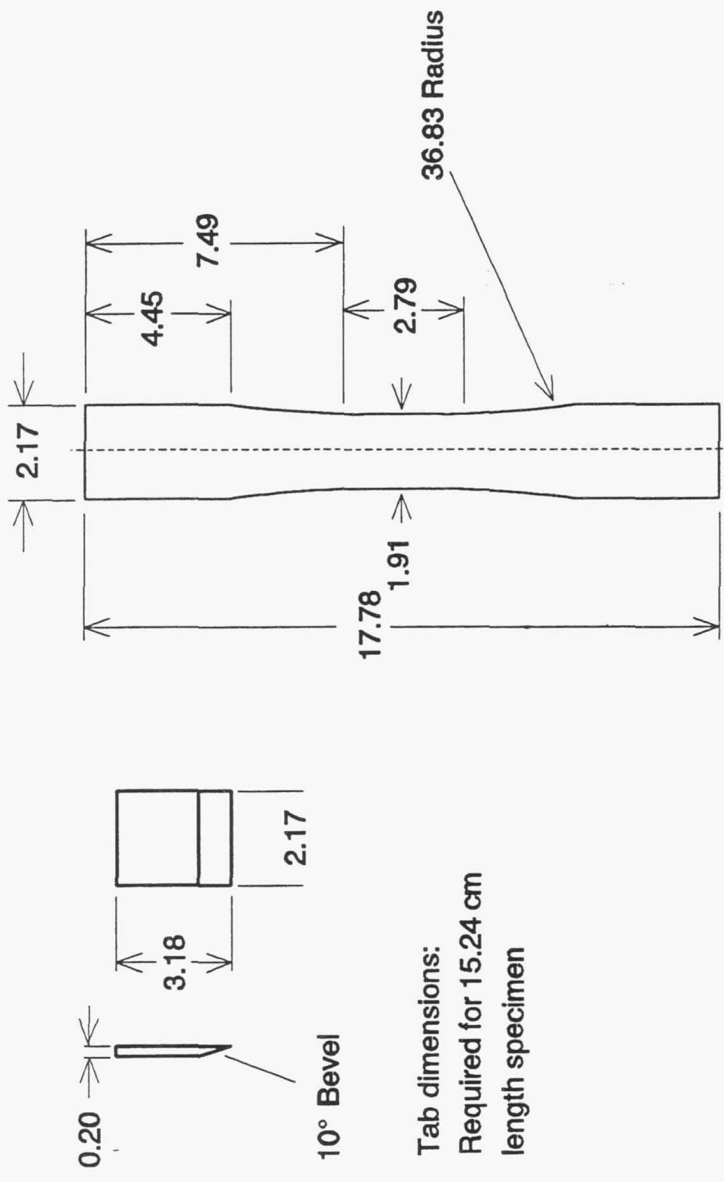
Schematic of 17.78 cm (7 in.) length specimen design. (Dimensions in centimeters)
